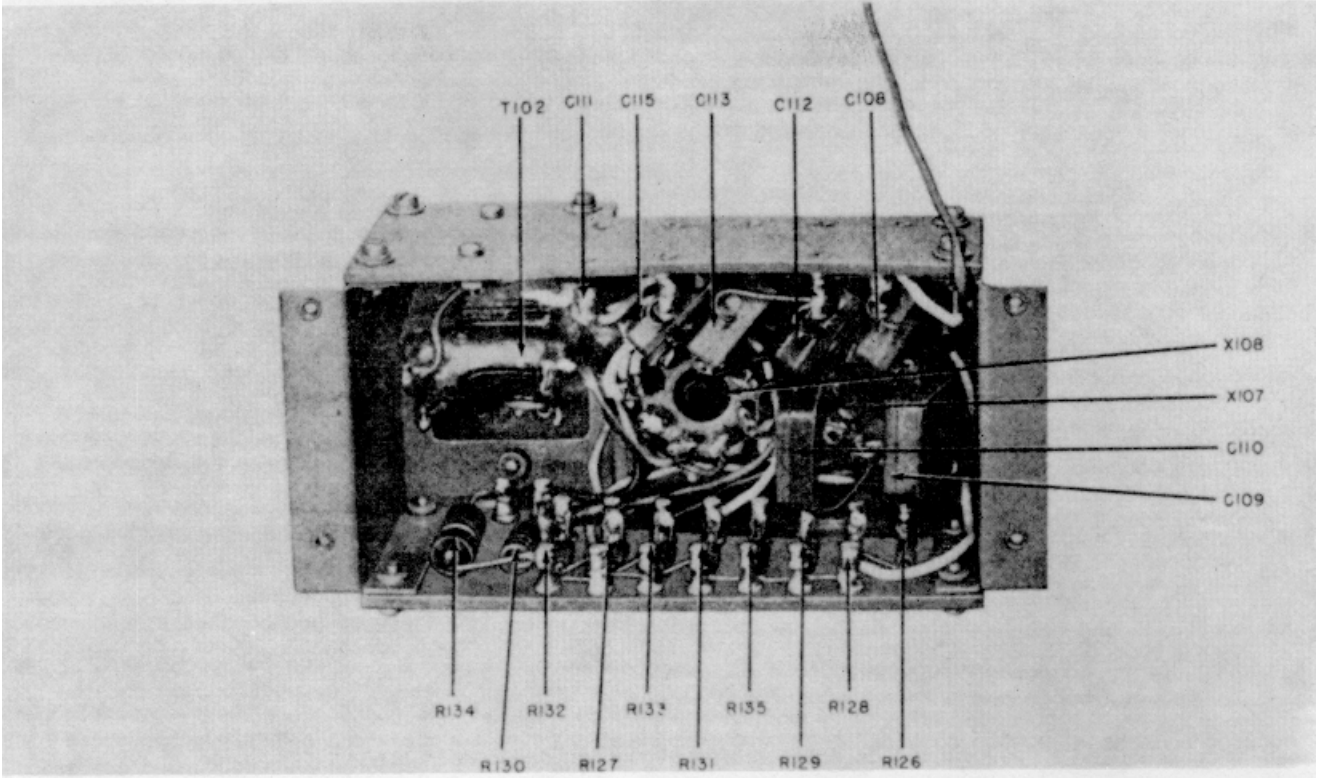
Video Amplifier Sub-Assembly, Bottom View
